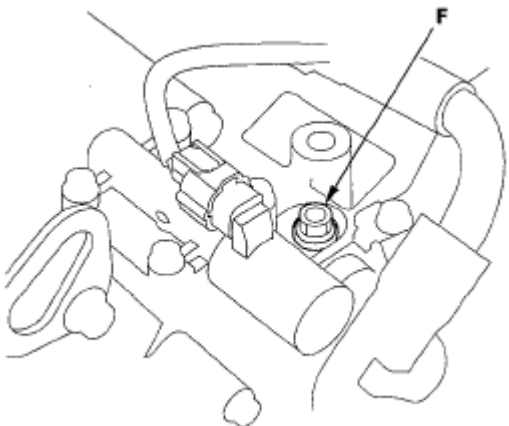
Identifying 4th Clutch Pressure Inspection Port
